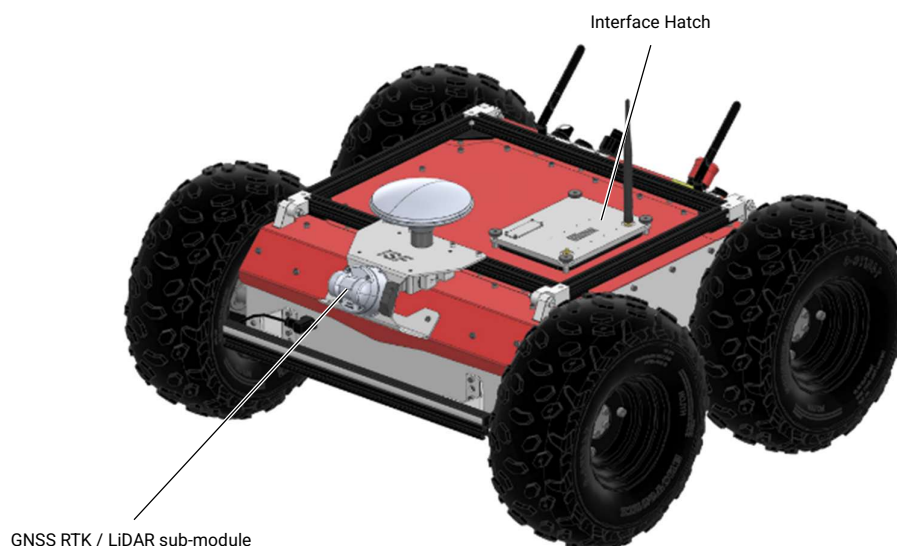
Top-Level Assembly with integrated GNSS RTK / LiDAR sub-module
